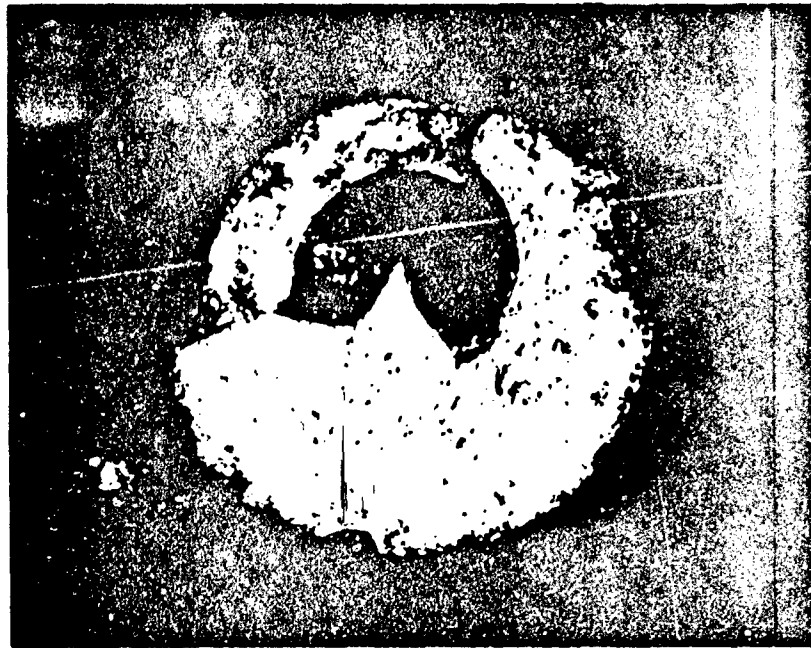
Fracture surface of a gas tungsten arc welded stud.
